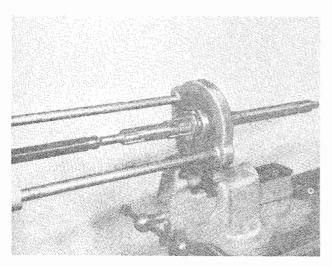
Fitting Mainshaft Centre Bearing with Churchill Press No. S4221 and Adapter from Set No. S4615.
